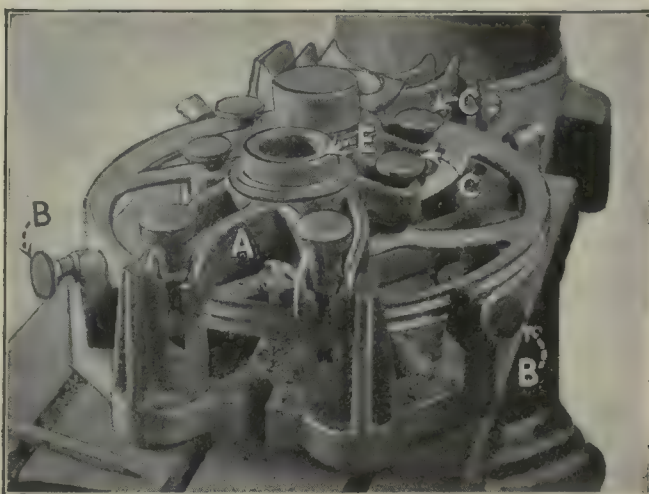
JIG FOR DRILLING GROOVED BELT PULLEY
